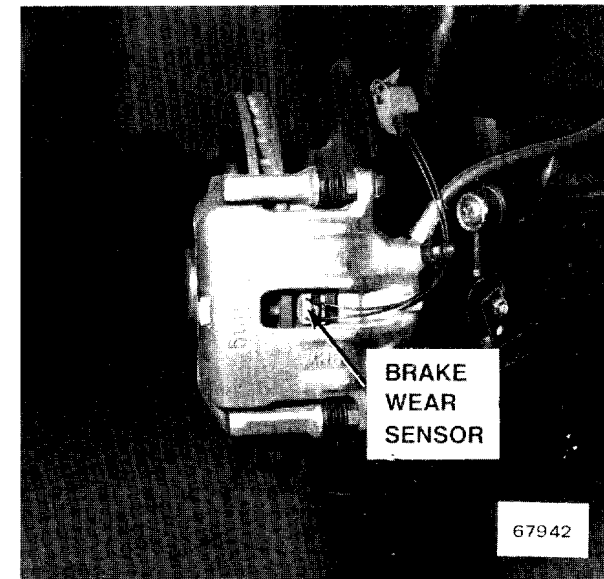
LH Front Brake Assembly (Wheel Removed) (RH Rear Similar)
